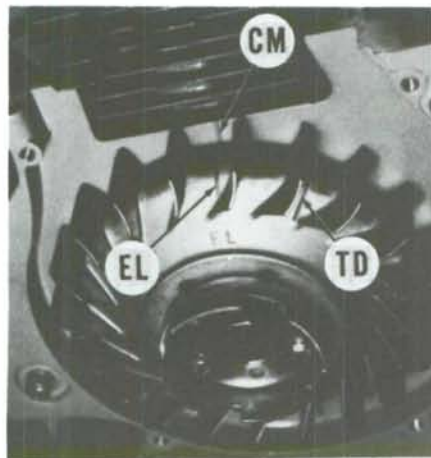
View of Ignition marks: CM—crankcase mark; EL—flywheel timing mark; TD—top dead center.
